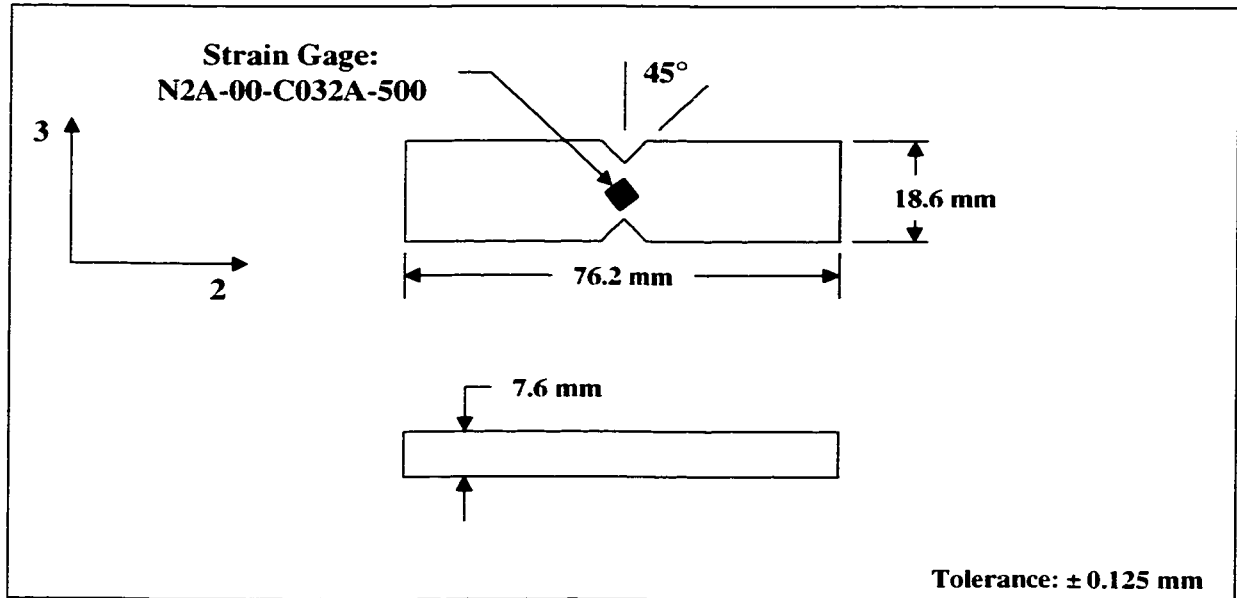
V-notch Beam Specimen Configuration.
